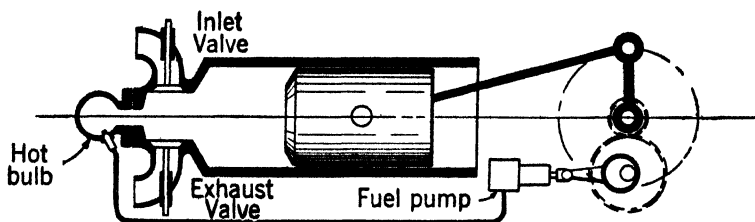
Diagrammatic Arrangement of 4-Cycle, Surface Ignition Oil Engine
